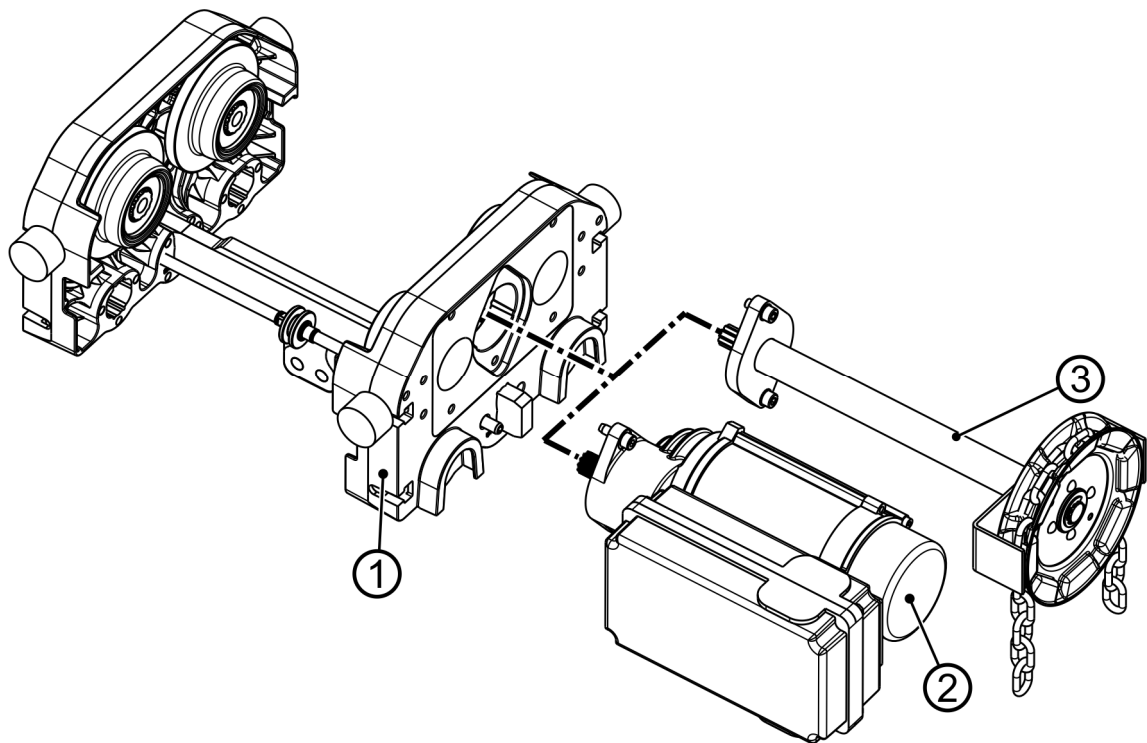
Trolley drive variants: manual, motor, and hand gear. This is an example of a CT trolley.
